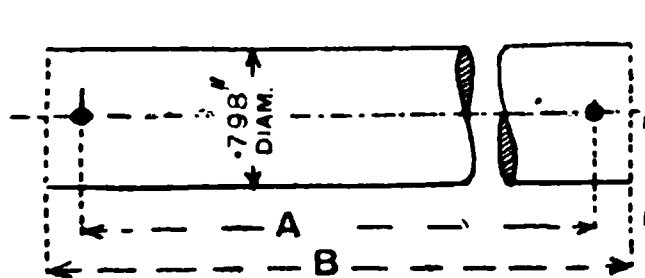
Test Piece for Forgings, Castings, etc. (Standard Form): A, gauge, length  $3\frac{1}{2}$  in.; B, parallel for not less than 4 in.
